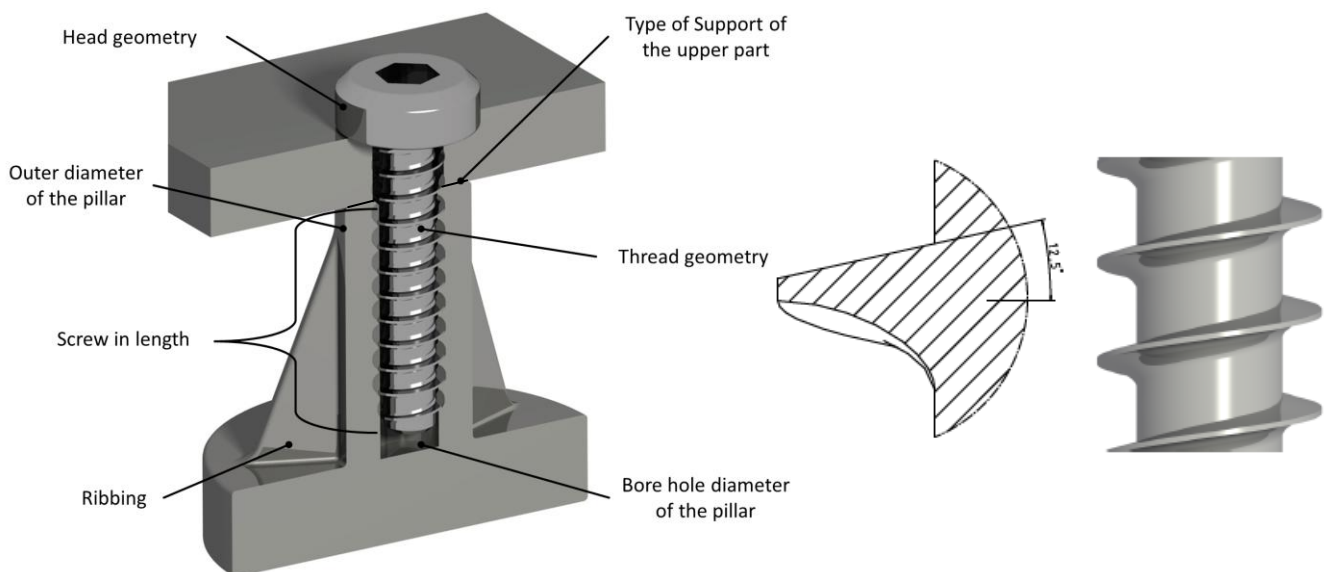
A self-tapping screw with a thread angle of about  $25^\circ$  connects a plate with plastic dome which is reinforced with ribs. The thread on the right has a special asymmetric geometry (REMFORM®).
